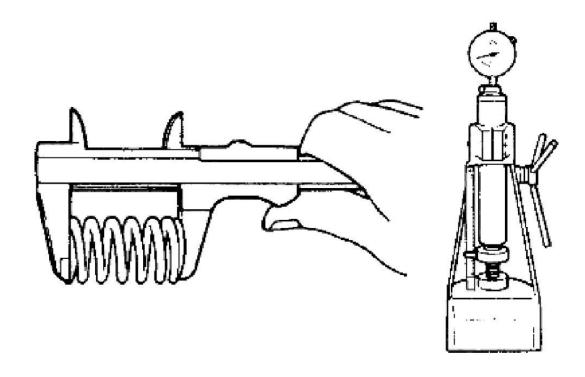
Inspecting Valve Spring Courtesy of SUZUKI OF AMERICA CORP.
